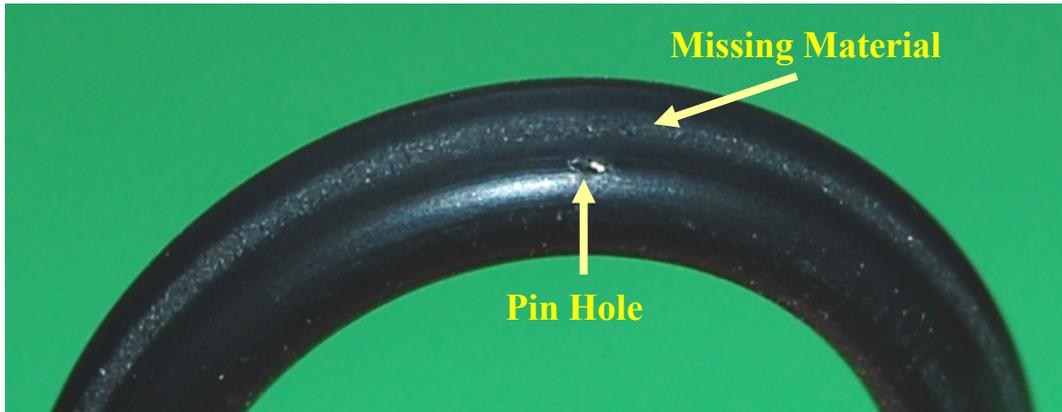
Figure 38H outer O-ring ID surfaces showing material loss and/or cracking and pin hole.
